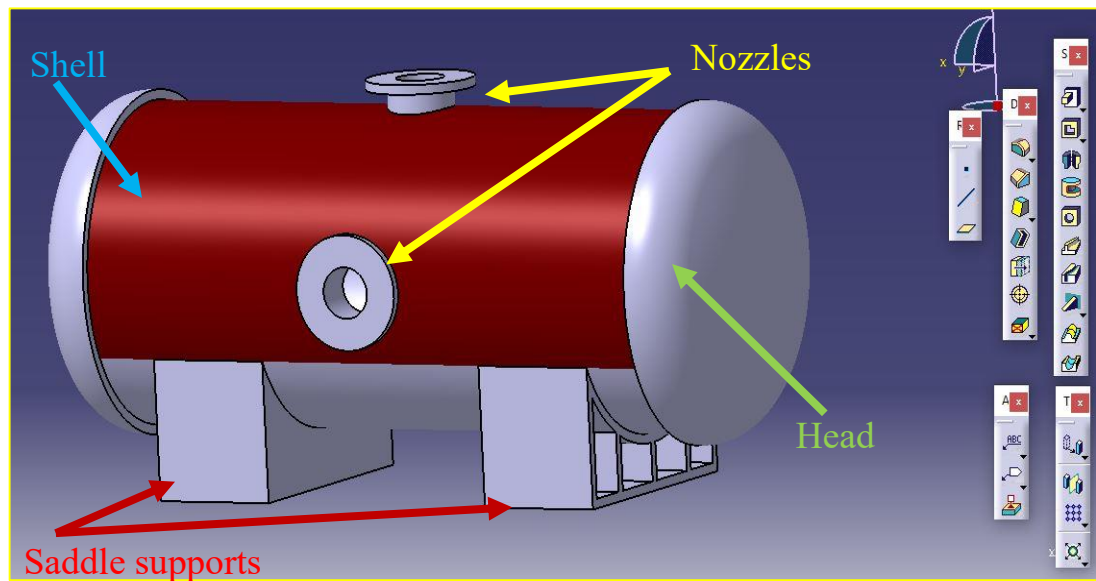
CATIA model of horizontal pressure vessel depicting shell, nozzles, heads and saddle supports
